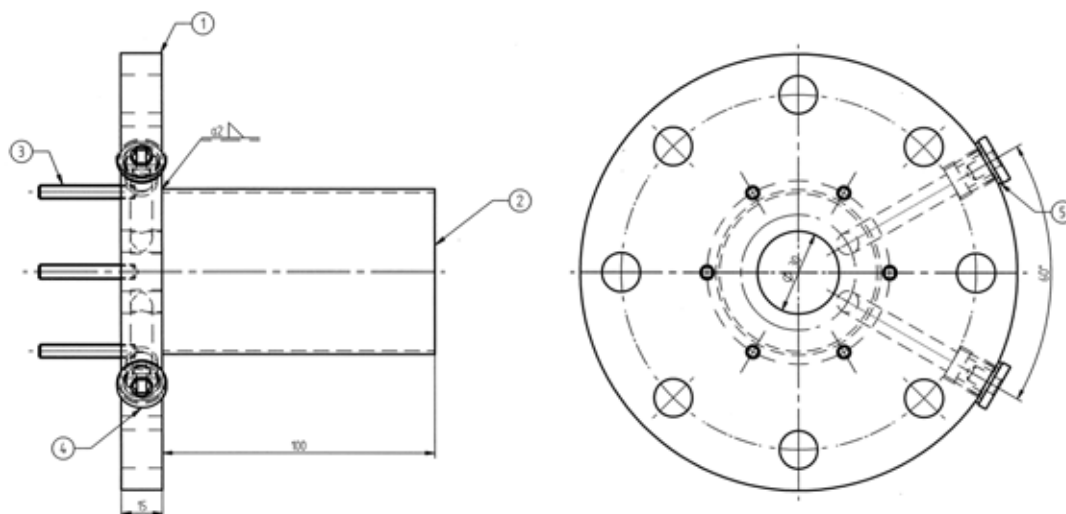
dimensional drawing high dust mounting flange SO656R1010
